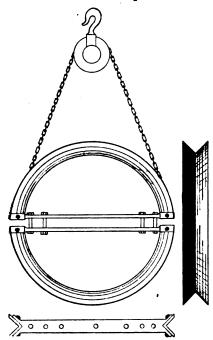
WHEEL USED FOR HANDLING LOCOMO-TIVE FRAMES.
